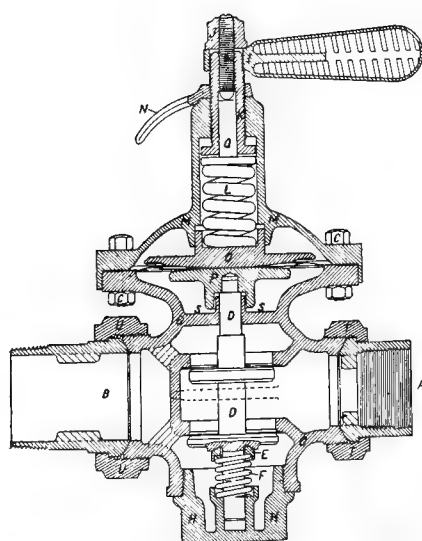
Gold's Improved Balance Valve Pressure Regulator, No. 528.
